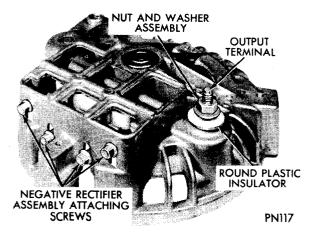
Removing Negative Rectifier Assembly and Output Terminal Nut
